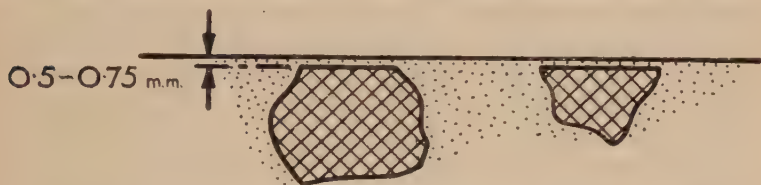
Sketch of Disc Fracture with Flakes not reaching the Edge.
